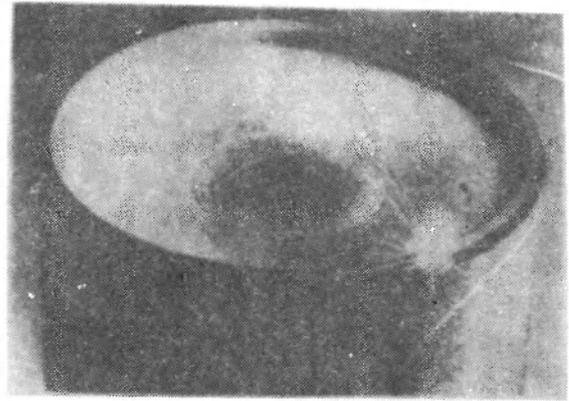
Laser welding of nickel-plated steel battery can
